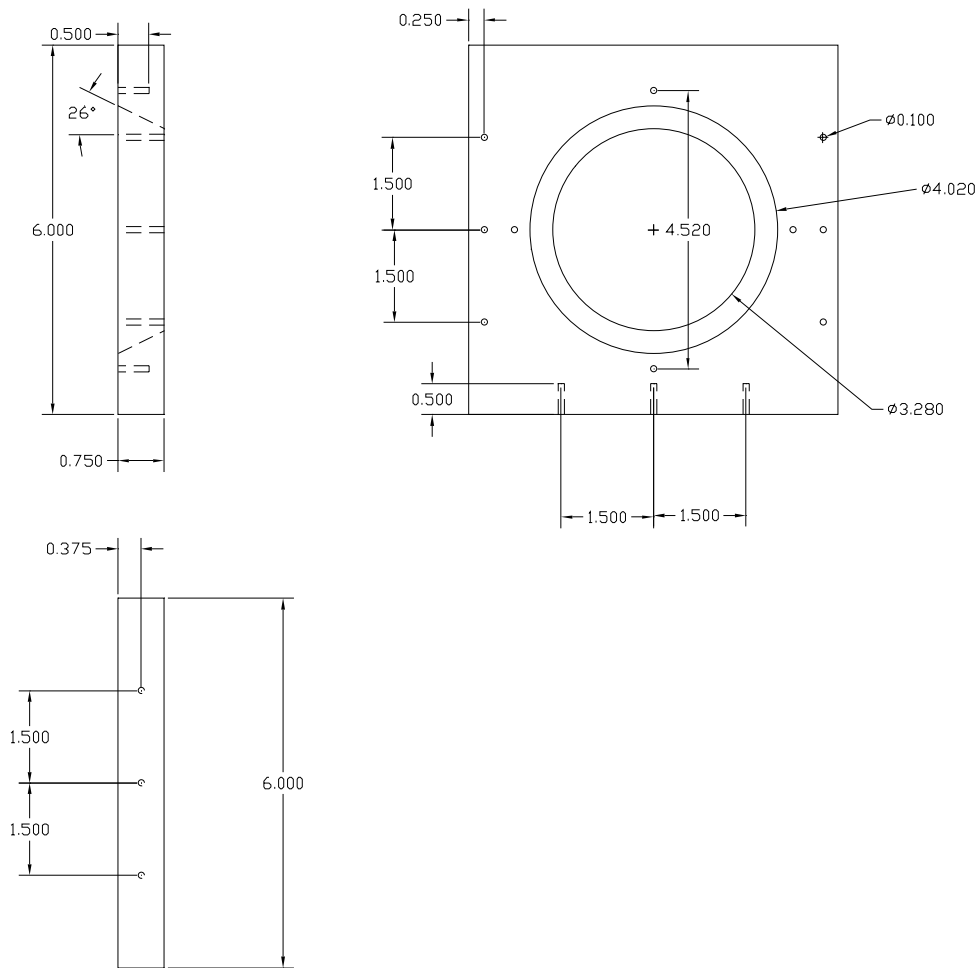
Vertical plate of the L-frame to which the specimen base is mounted (dimensions in inches).
